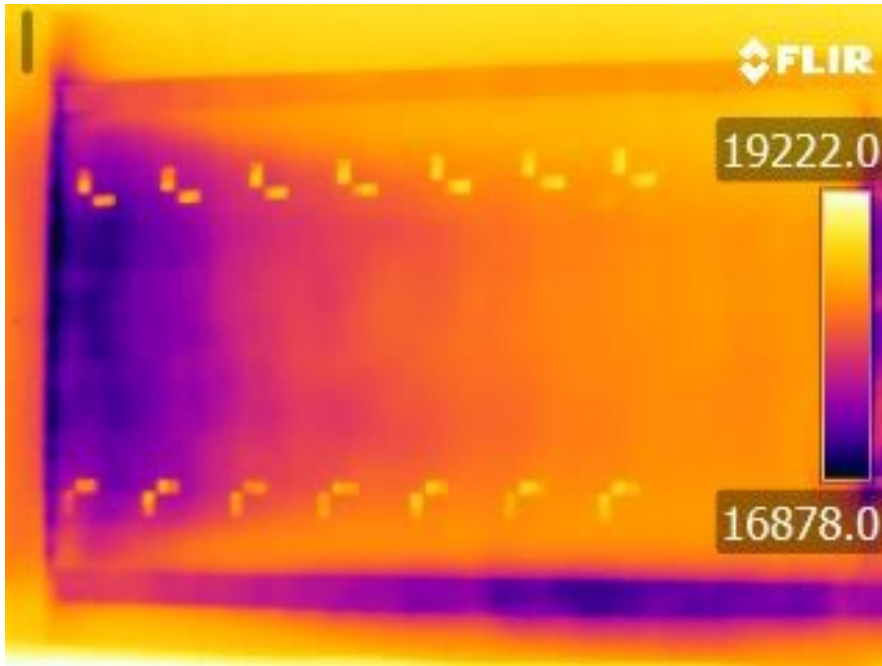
Thermographic image of test plate during a machined ring test run
